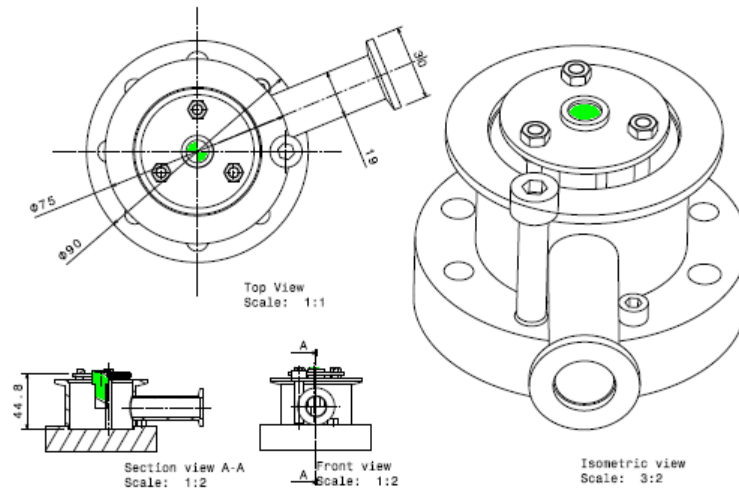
Technical drawing of the laser-mount (courtesy of R. Rosing)
